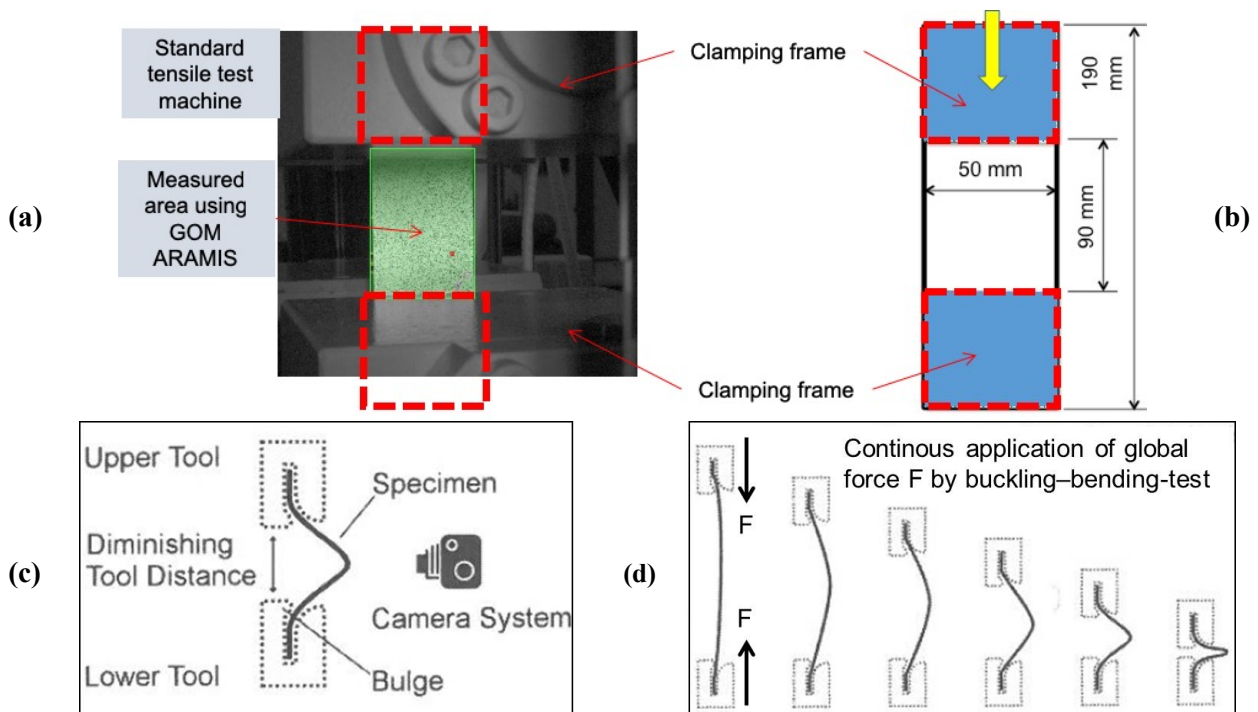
Buckling bending test performed at IFU, (a) Buckling bending specimen clamped in tensile test machine; (b) Sketch of buckling bending specimen, clamping area and measurement area; (c) Position of the tensile test machine and ARAMIS optical measurement system in experiment [Hoe13]; (d) Development of surface contour during the BBT test [Hoe13].
